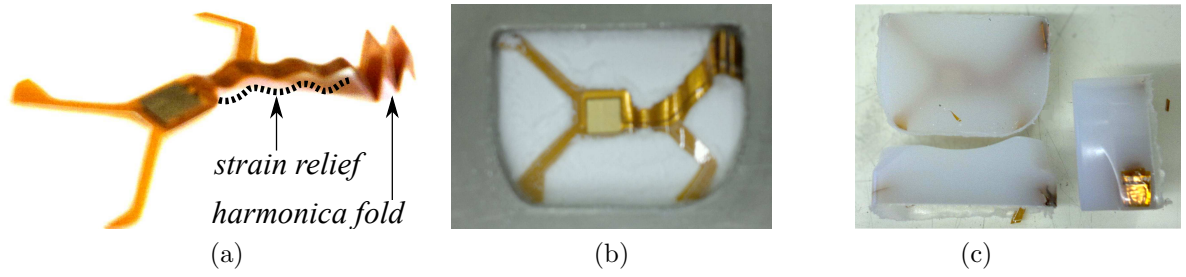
Bearing moulding in all its stages: (a) prepared the sensor foil, with the folded sensor lead in the top right corner, (b) placing the sensor foil in the mould, on top of half the UHMWPE powder, (c) the finished product.
